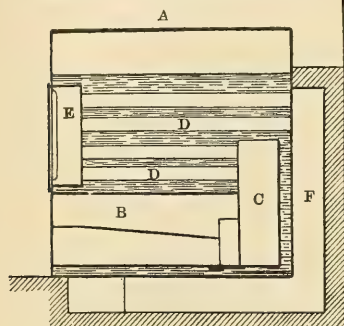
Return Tubular Boiler. Longitudinal Section.
